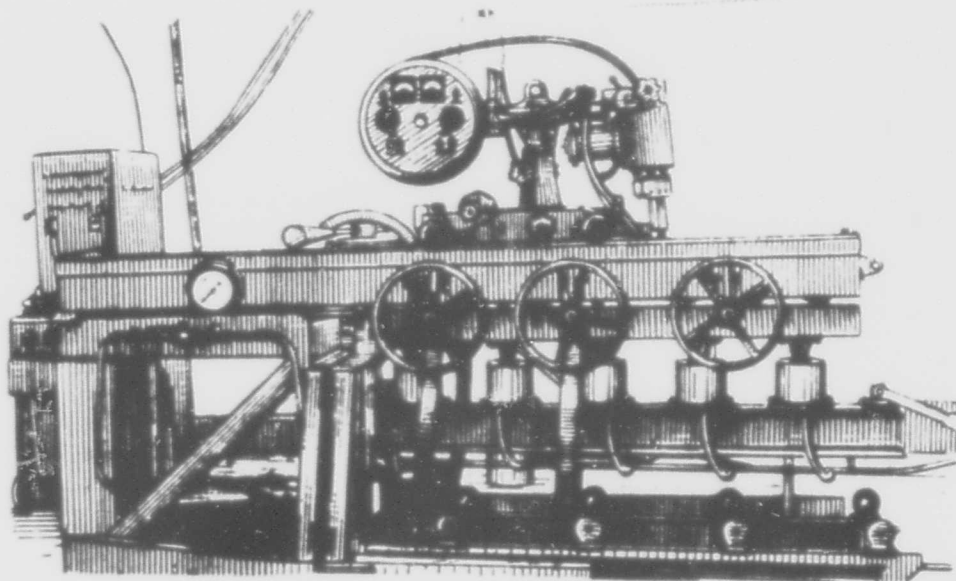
Welding stand with tractor of ADS-1000-2.
